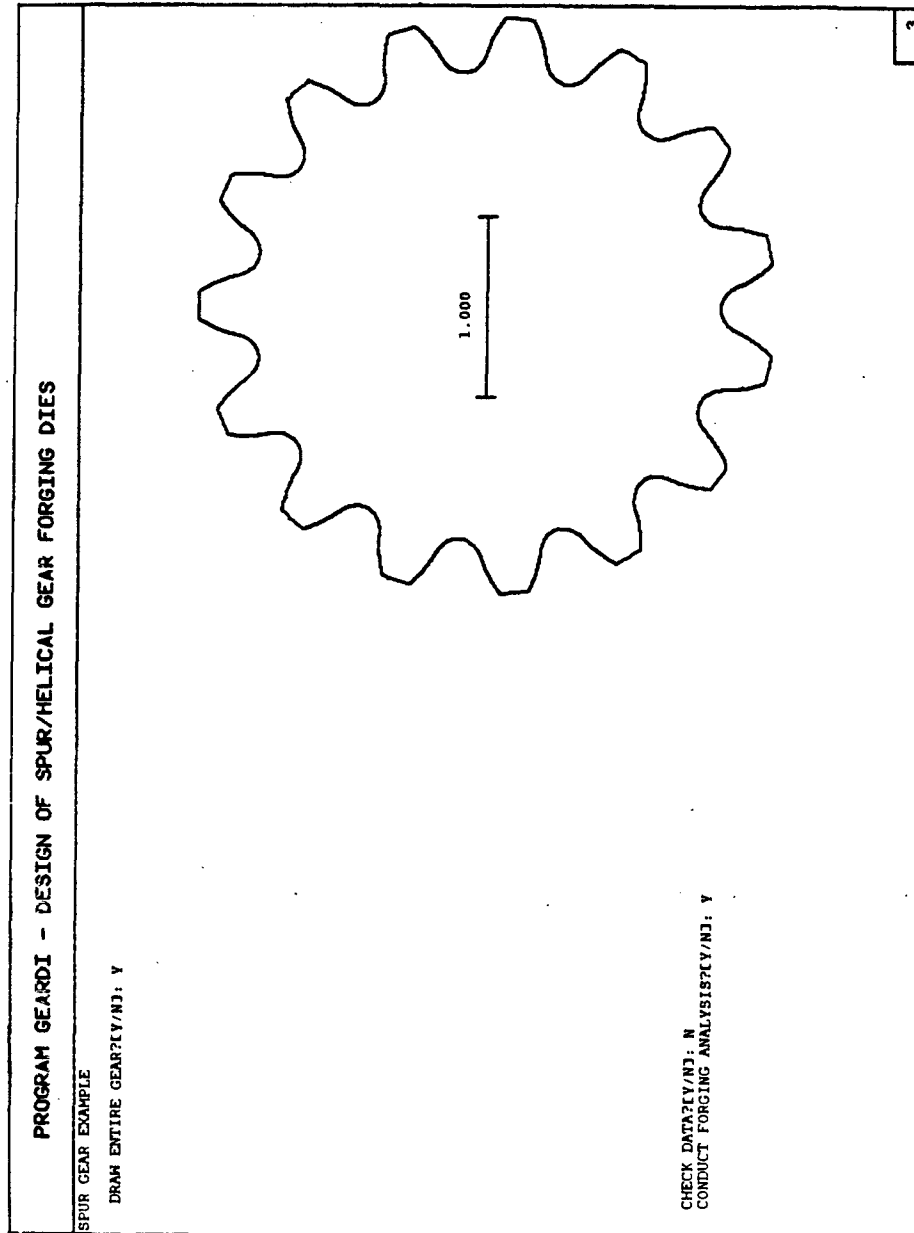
Spur Gear Example; Entire Gear with Altered Fillet
